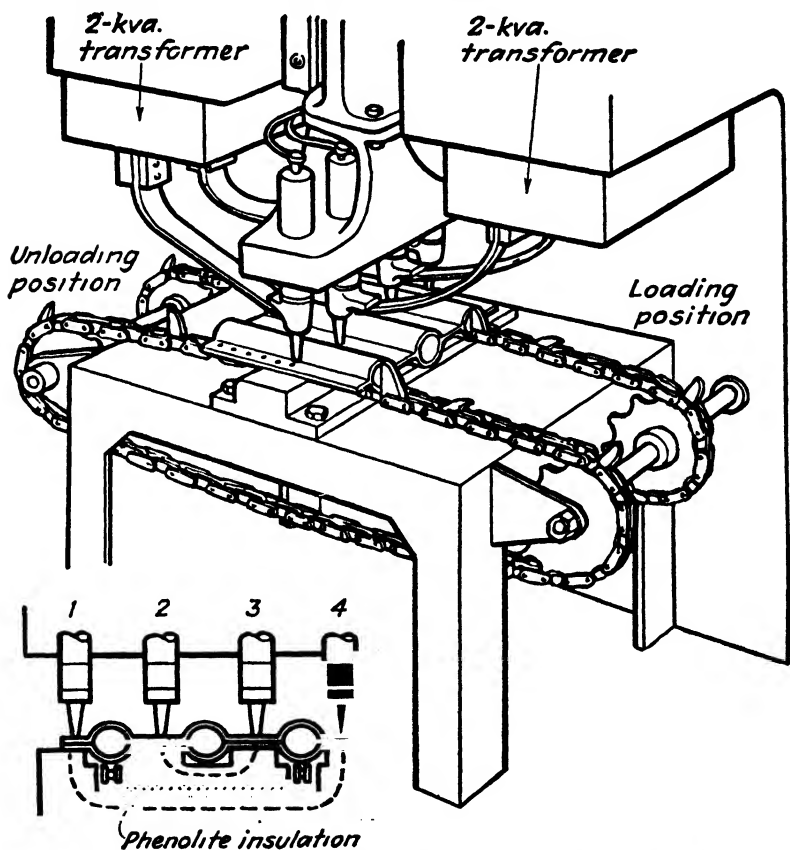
A method of double series welding. Two transformers, with interlocked controls, feed four welding points.
